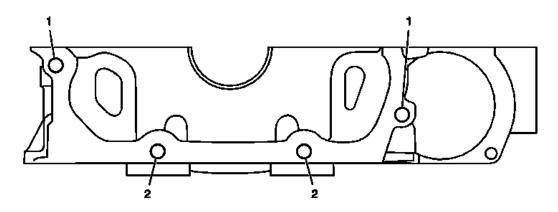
Engine Block Thread Specifications -- Top View Courtesy of GENERAL MOTORS COMPANY
